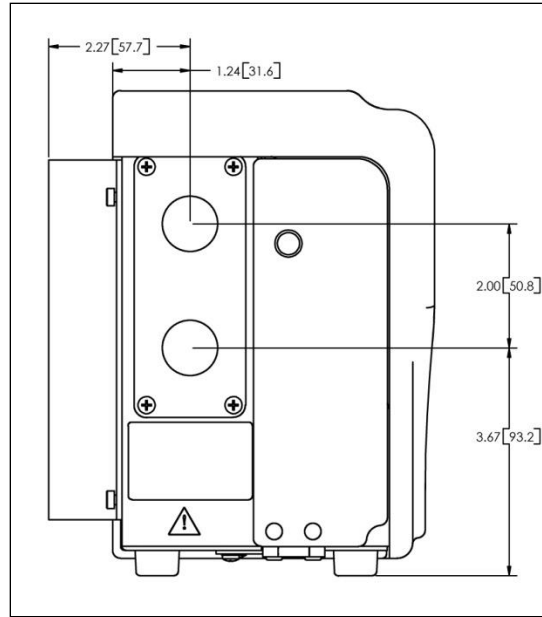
Sensor Dimensions and Required Clearances, Left Side View
